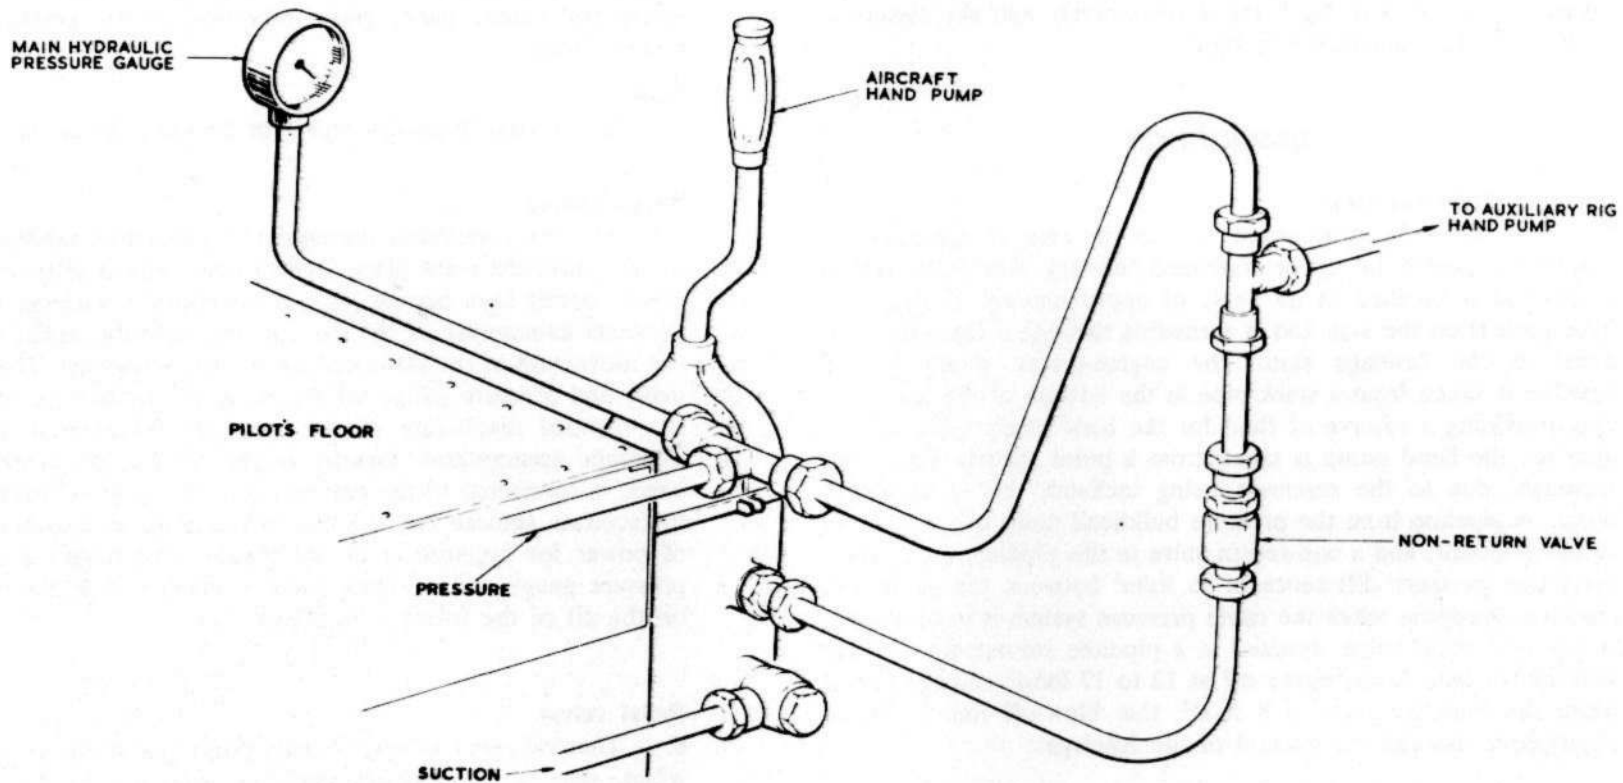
FIG. I. AUXILIARY HAND PUMP CIRCUIT
